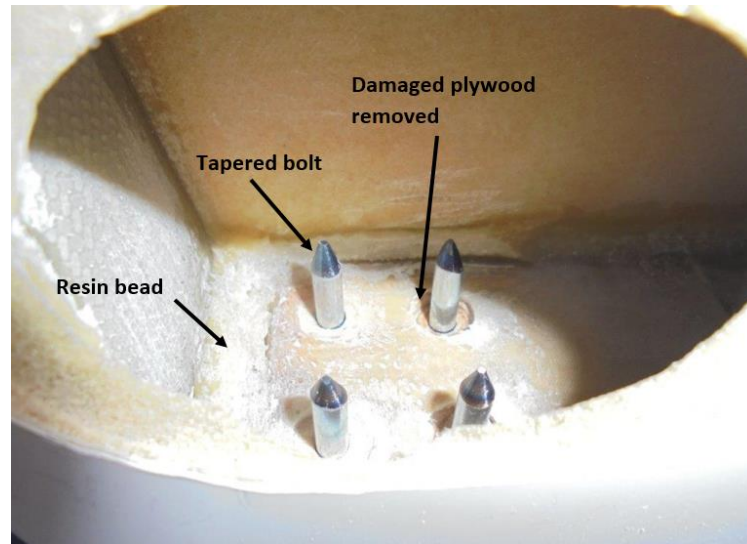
Insert damage removed and tapered bolts installed (principle image)
